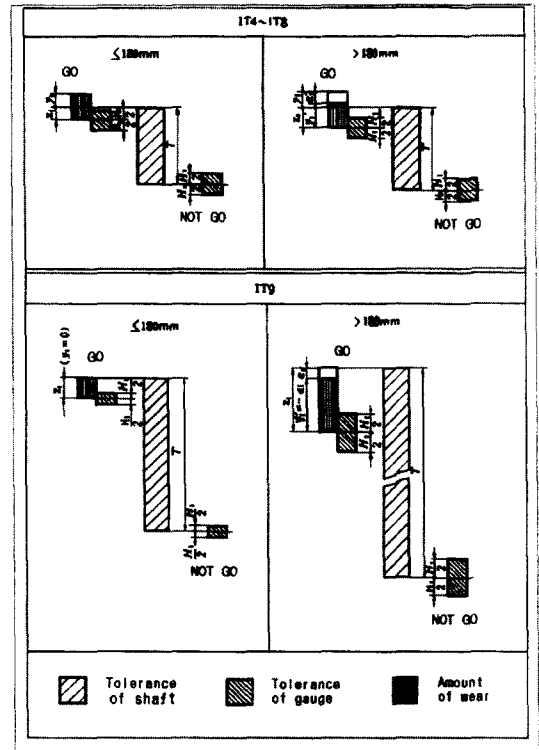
Relation between manufacturing tolerance of limit gauges for shafts and workpiece tolerance
